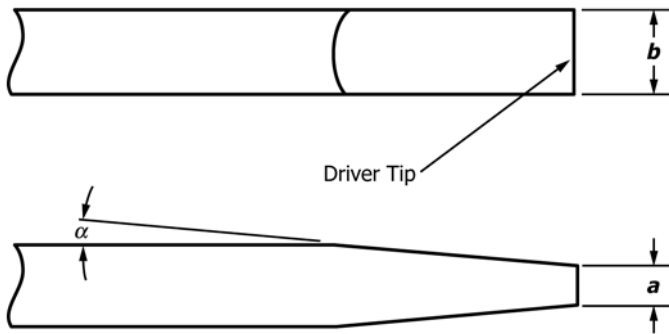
Dimensions of Single-Slot Screwdriver Bit
